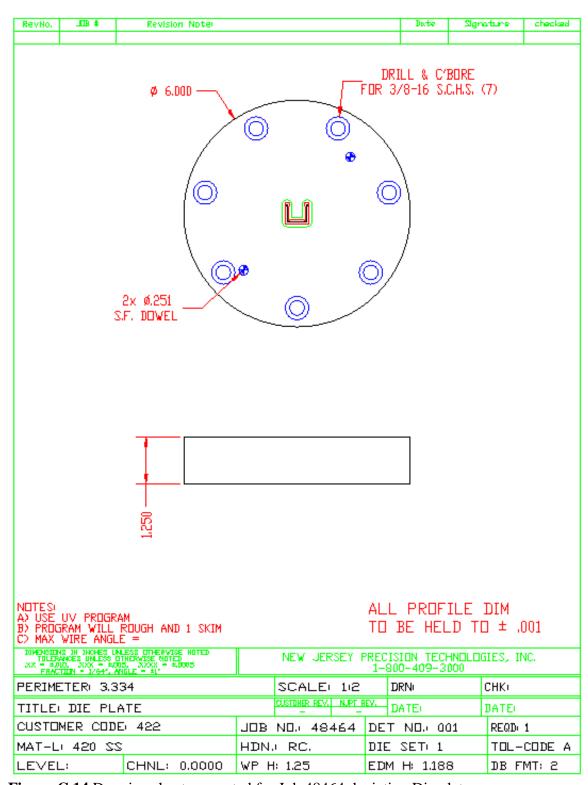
Drawing sheet generated for Job 48464 depicting Die plate.
